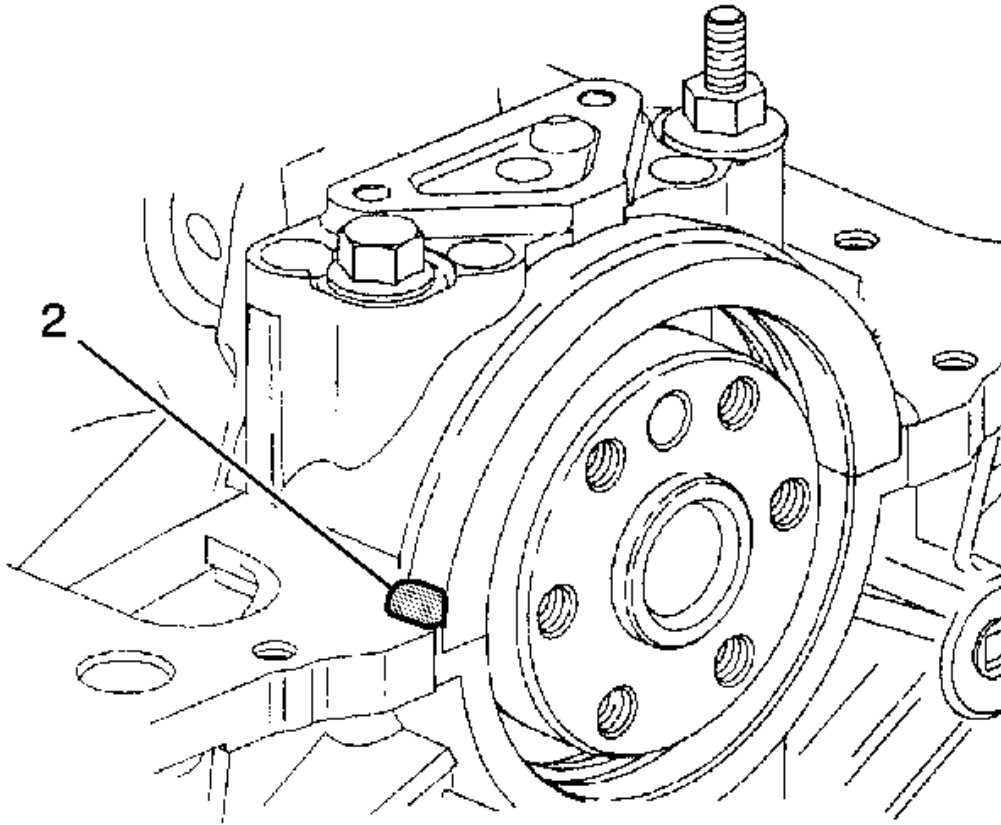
Applying Sealer To Rear Of #4 Crankshaft Main Bearing Cap Sealing Surface
